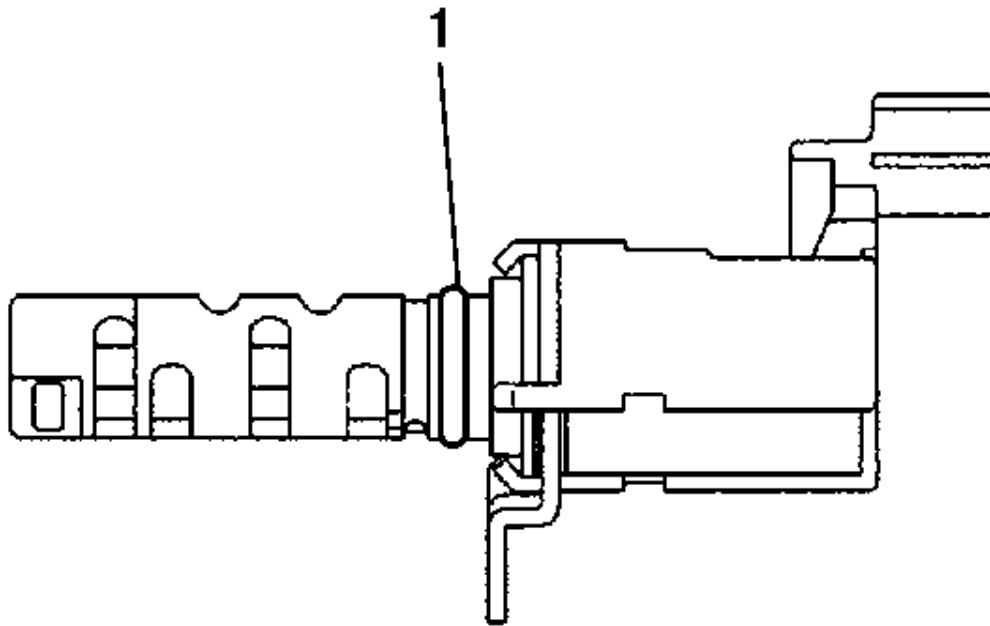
View Of Camshaft Timing Oil Control Valve Assembly
